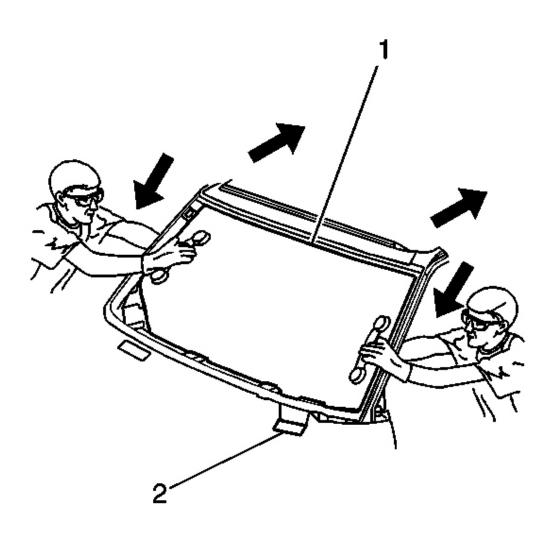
Installing Windshield Courtesy of GENERAL MOTORS CORP.
